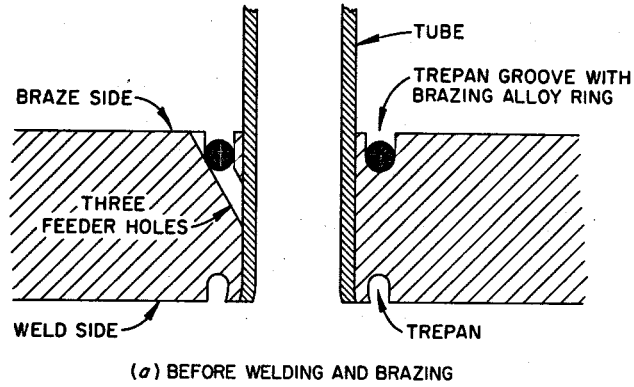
Tube-to-Tube Sheet Joint MSRE Primary Heat Exchanger.
